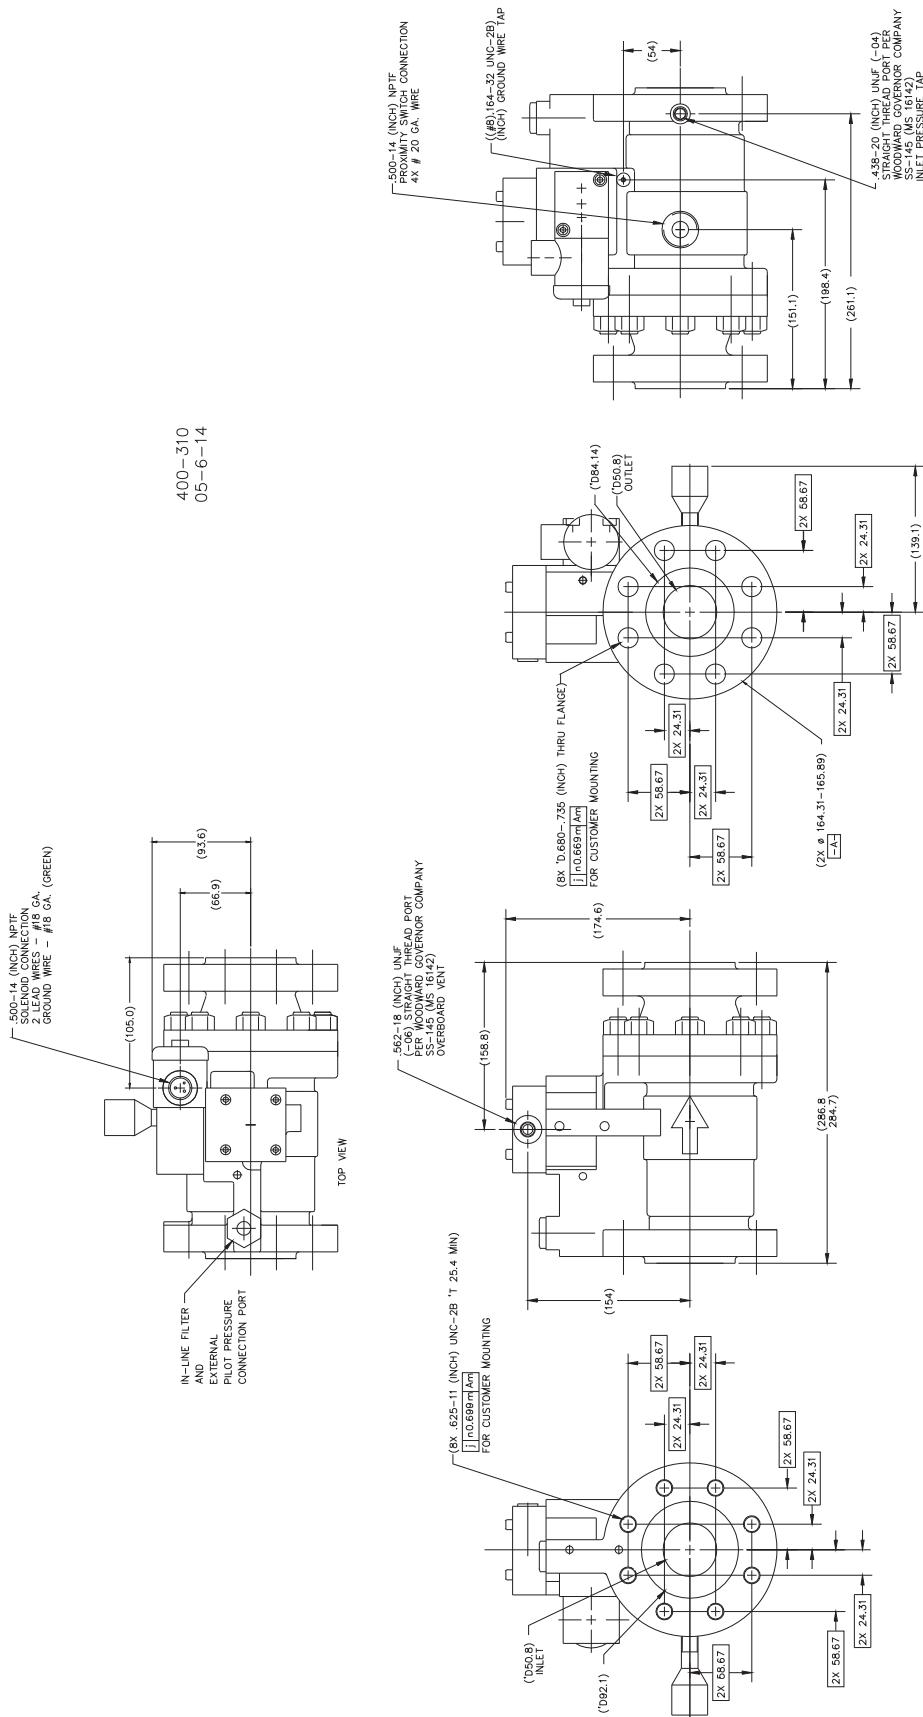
Outline Drawing of Gas Shutoff Valve (GSOV25)
